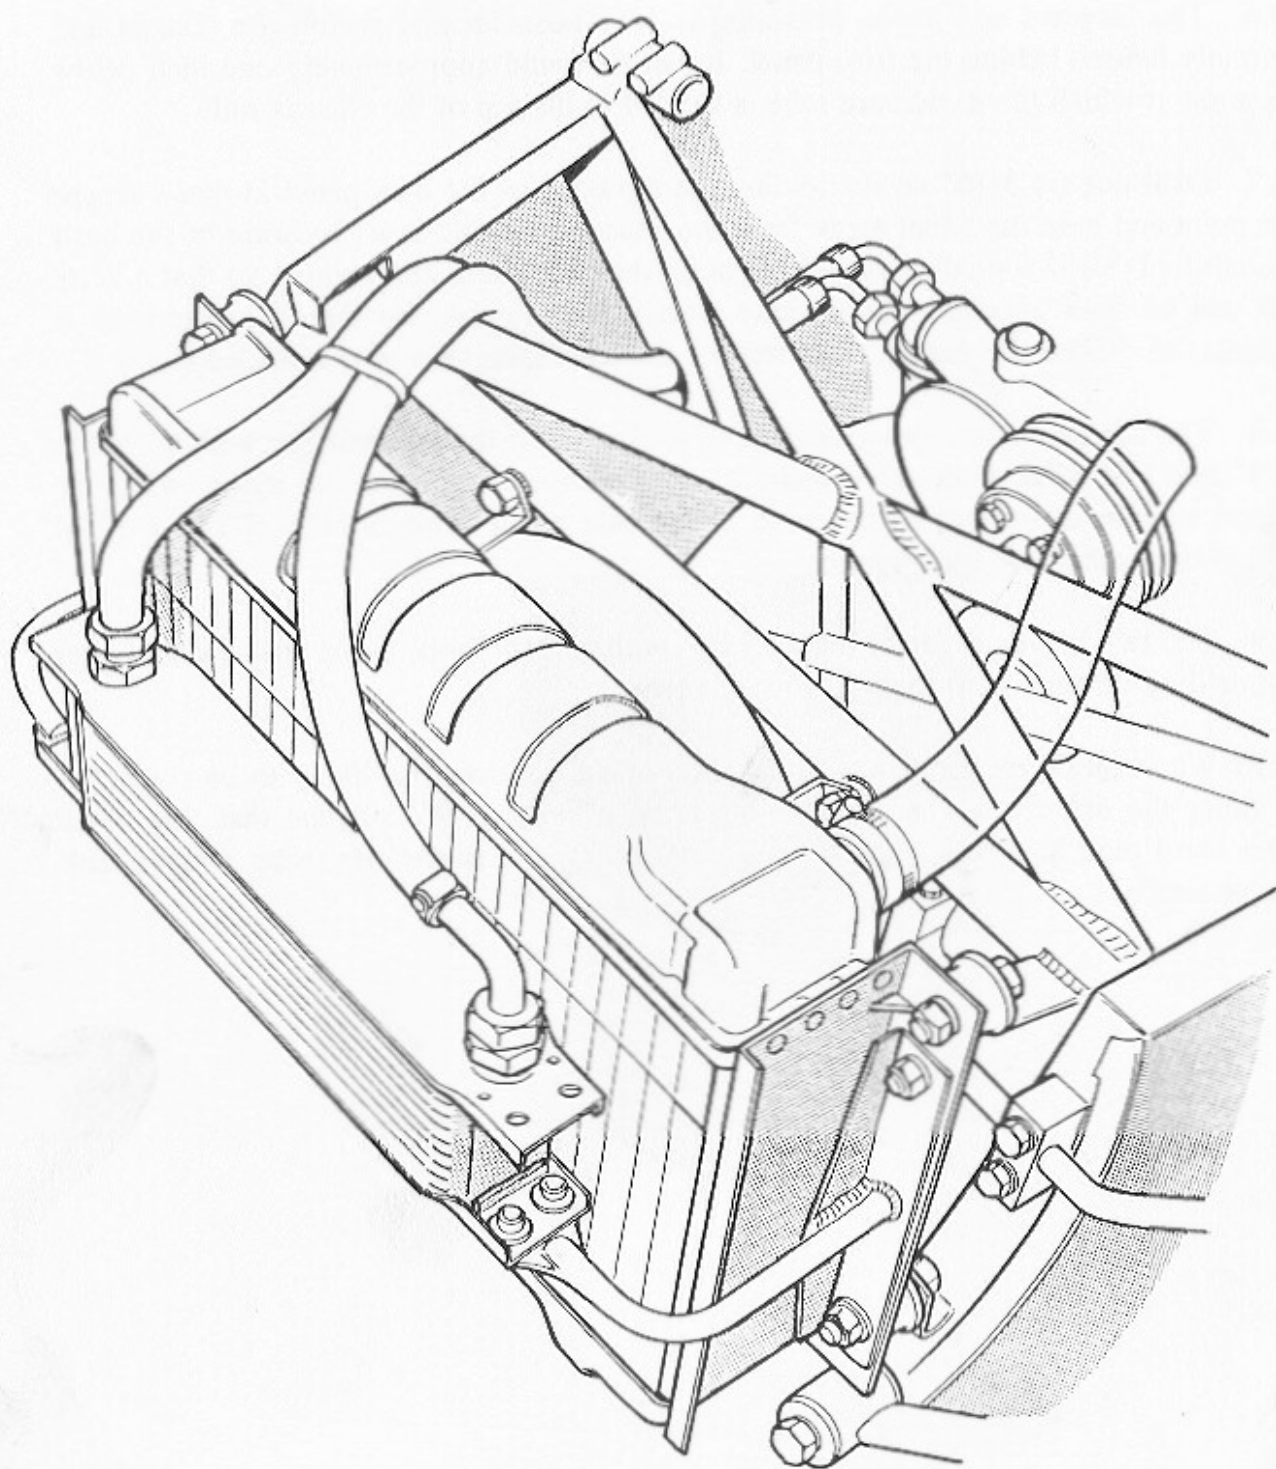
A Oil Cooler Pipes Layout (Front View)
